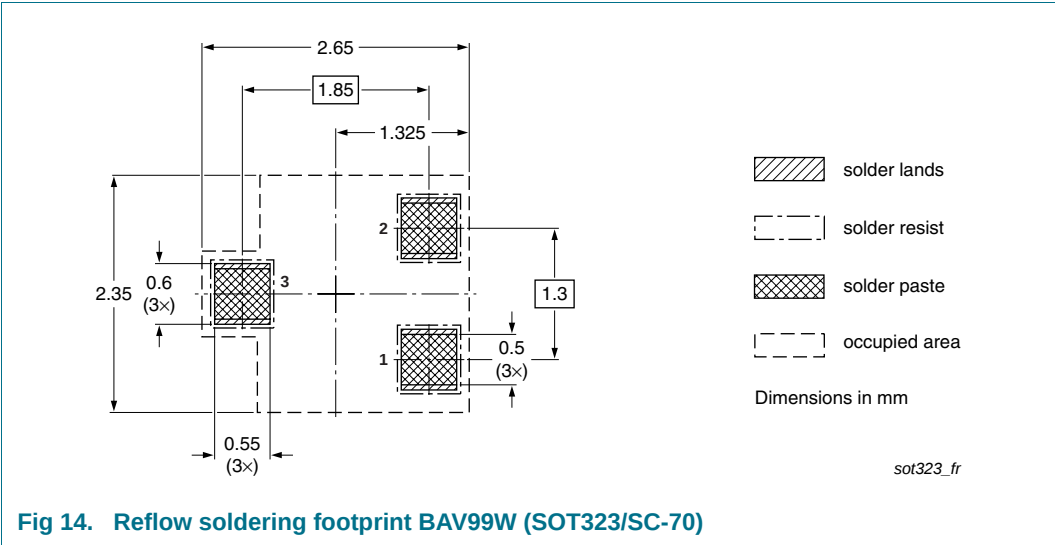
Reflow soldering footprint BAV99W (SOT323/SC-70)
